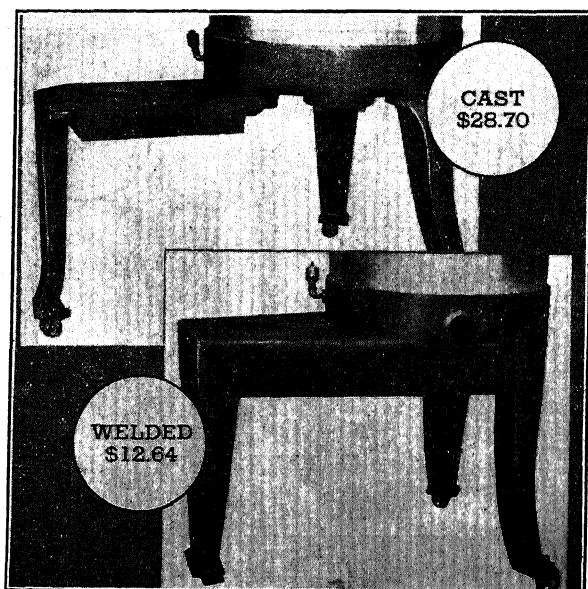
This three-legged stand for a potato and vegetable peeler formerly consisted of a bolted assembly of cast iron parts, costing \$28.70. The new welded steel design of improved appearance and unbreakable construction costs only \$12.64. Moreover, the welded steel model can be supplied in any height desired by the customer; the old design would require separate patterns for every height.
